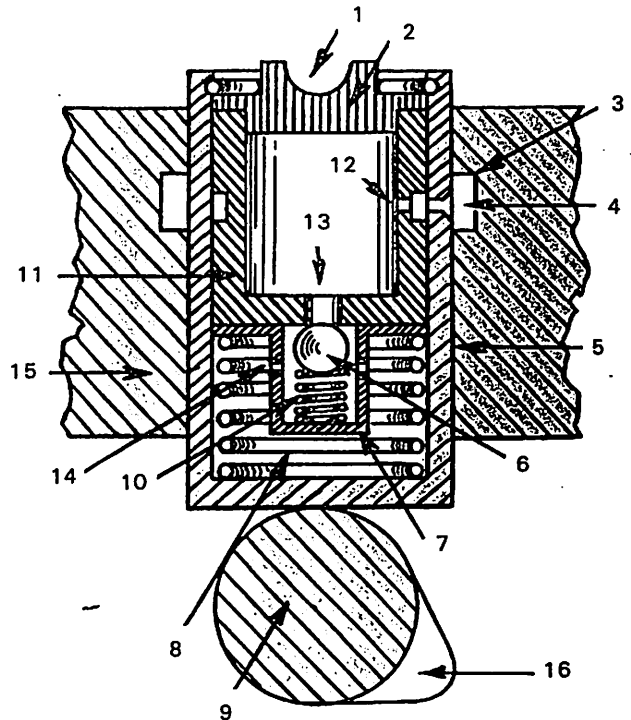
Typical hydraulic valve lifter. Oil enters channel 3 in block, passes through hole 4 in lifter body 5, then enters hole 12 in inner piston. It fills inner piston cavity and passes through hole 13. This pressure will push check ball 6 off its seat. It now flows through hole 14 in the lifter cage 7. It fills the cavity under inner piston 11. The pressure raises inner piston up until it contacts valve push rod, or stem, whichever is used. Other parts are: 1—Push rod seat. 2—Inner piston cap. 15—Block. 8—Inner piston spring. 10—Ball check spring. 9—Camshaft. 16—Lobe.
